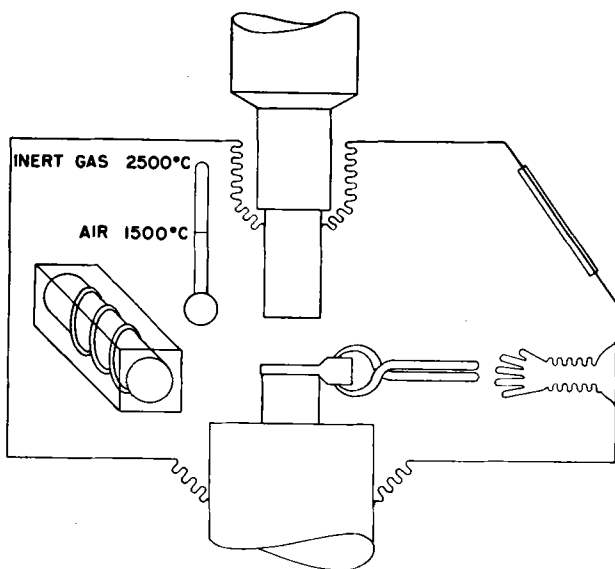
Schematic drawing of the work chamber attached to the forging hammer and induction furnace.
